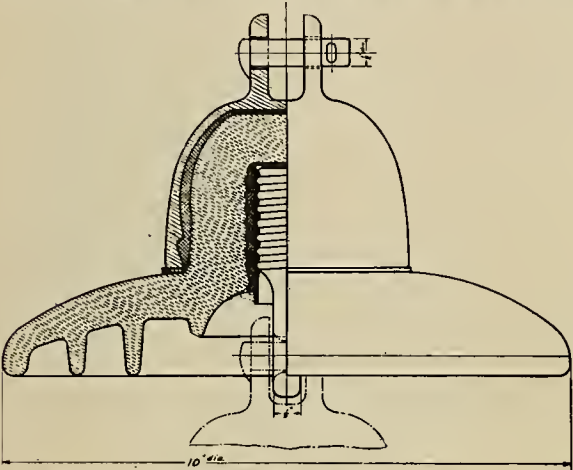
Eyebolt with pressed metal sleeve, assembled with porcelain. The expansion is taken care of by the slight air space.
